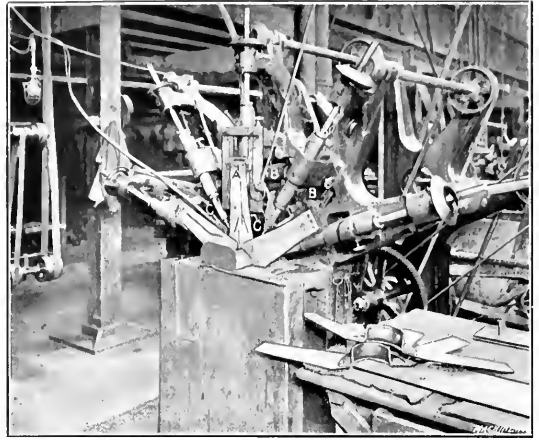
Multiple Drilling Machine for drilling Rivet Holes in Hub of Spider
